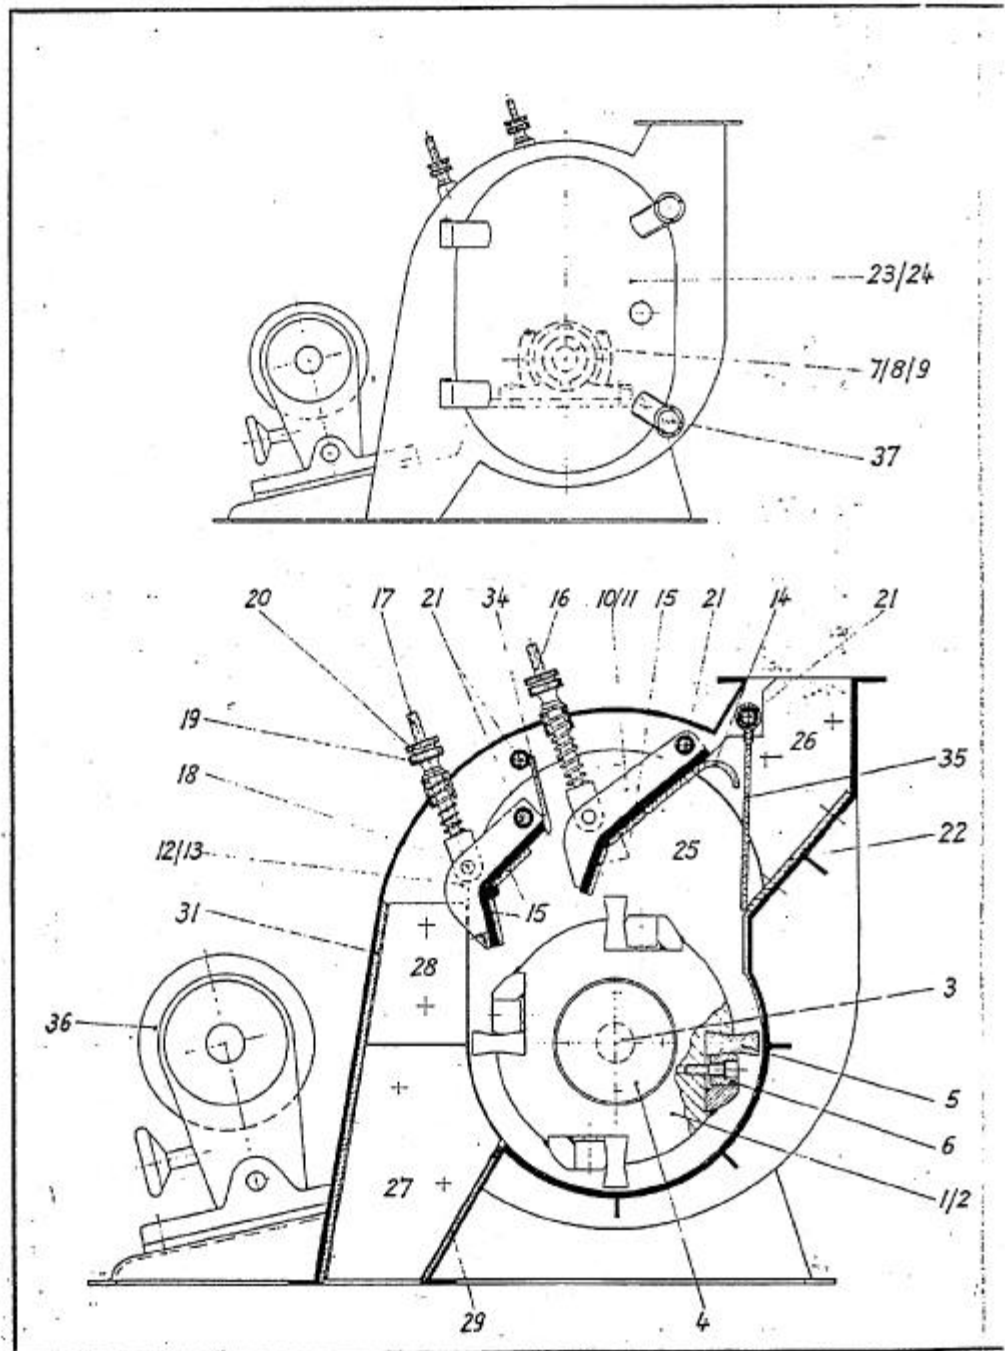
IMPACT MILL - CUTAWAY VIEW
